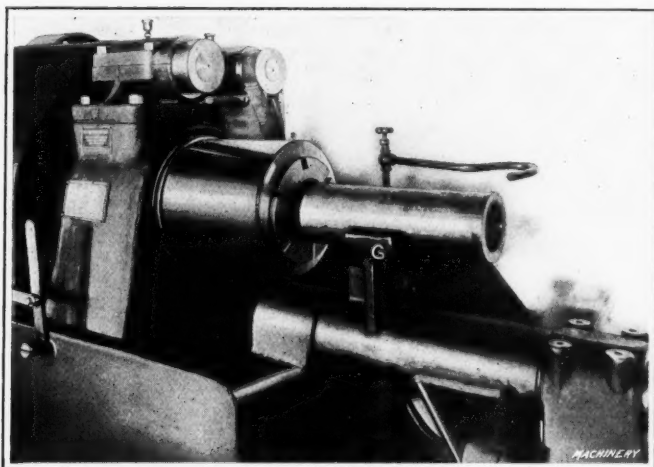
Bracket G in Position to load Shell Forging into Collet
